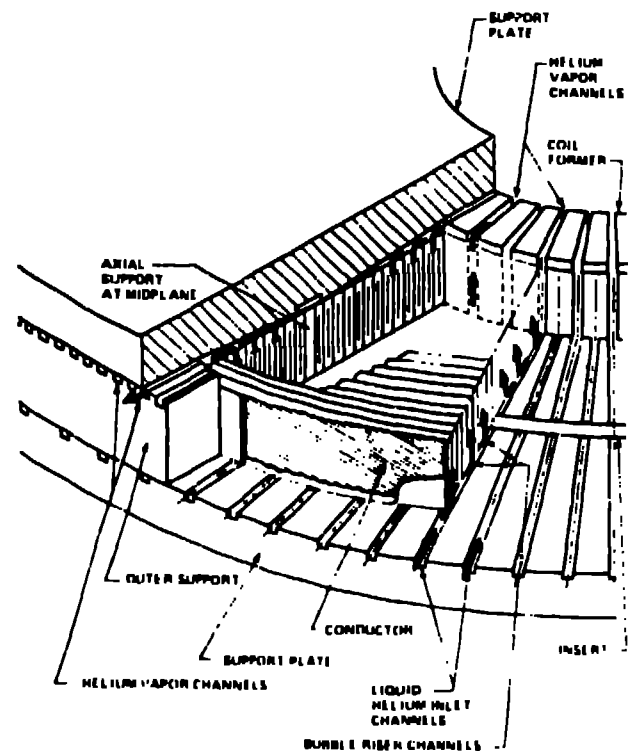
ONE PANCAKE ASSEMBLY SHOWING COOLANT FLOW PATTERN
